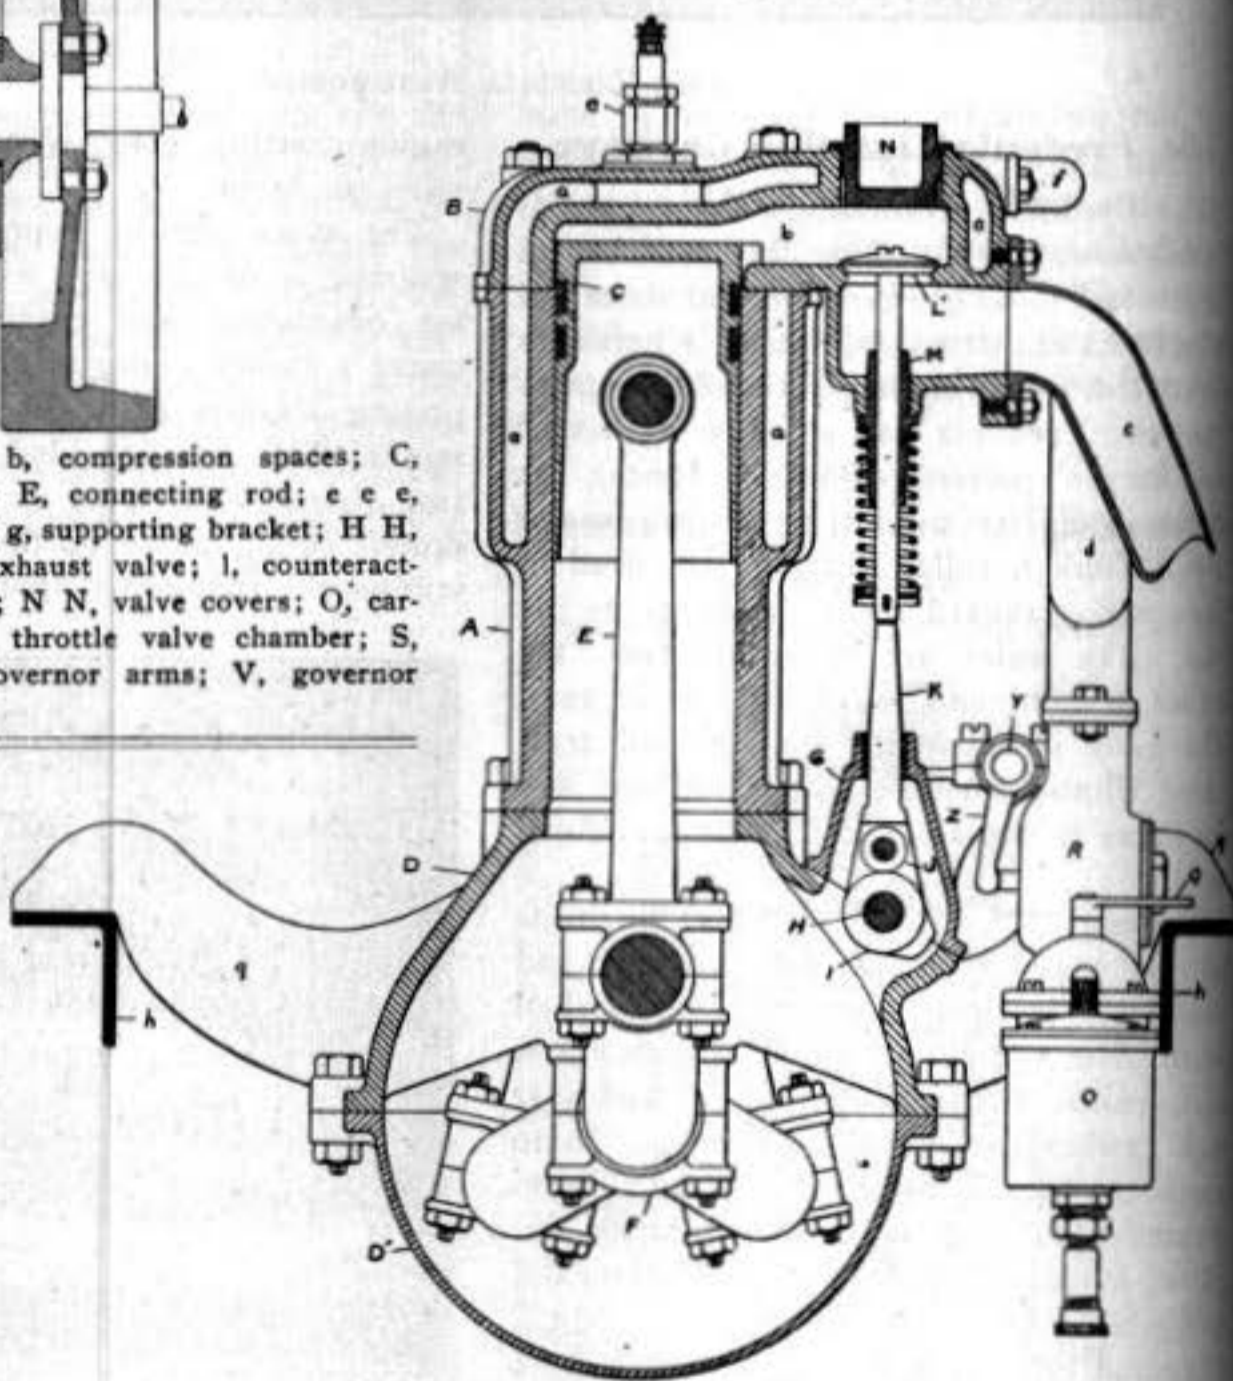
SECTION THROUGH CYLINDER AND VALVE BOX.
